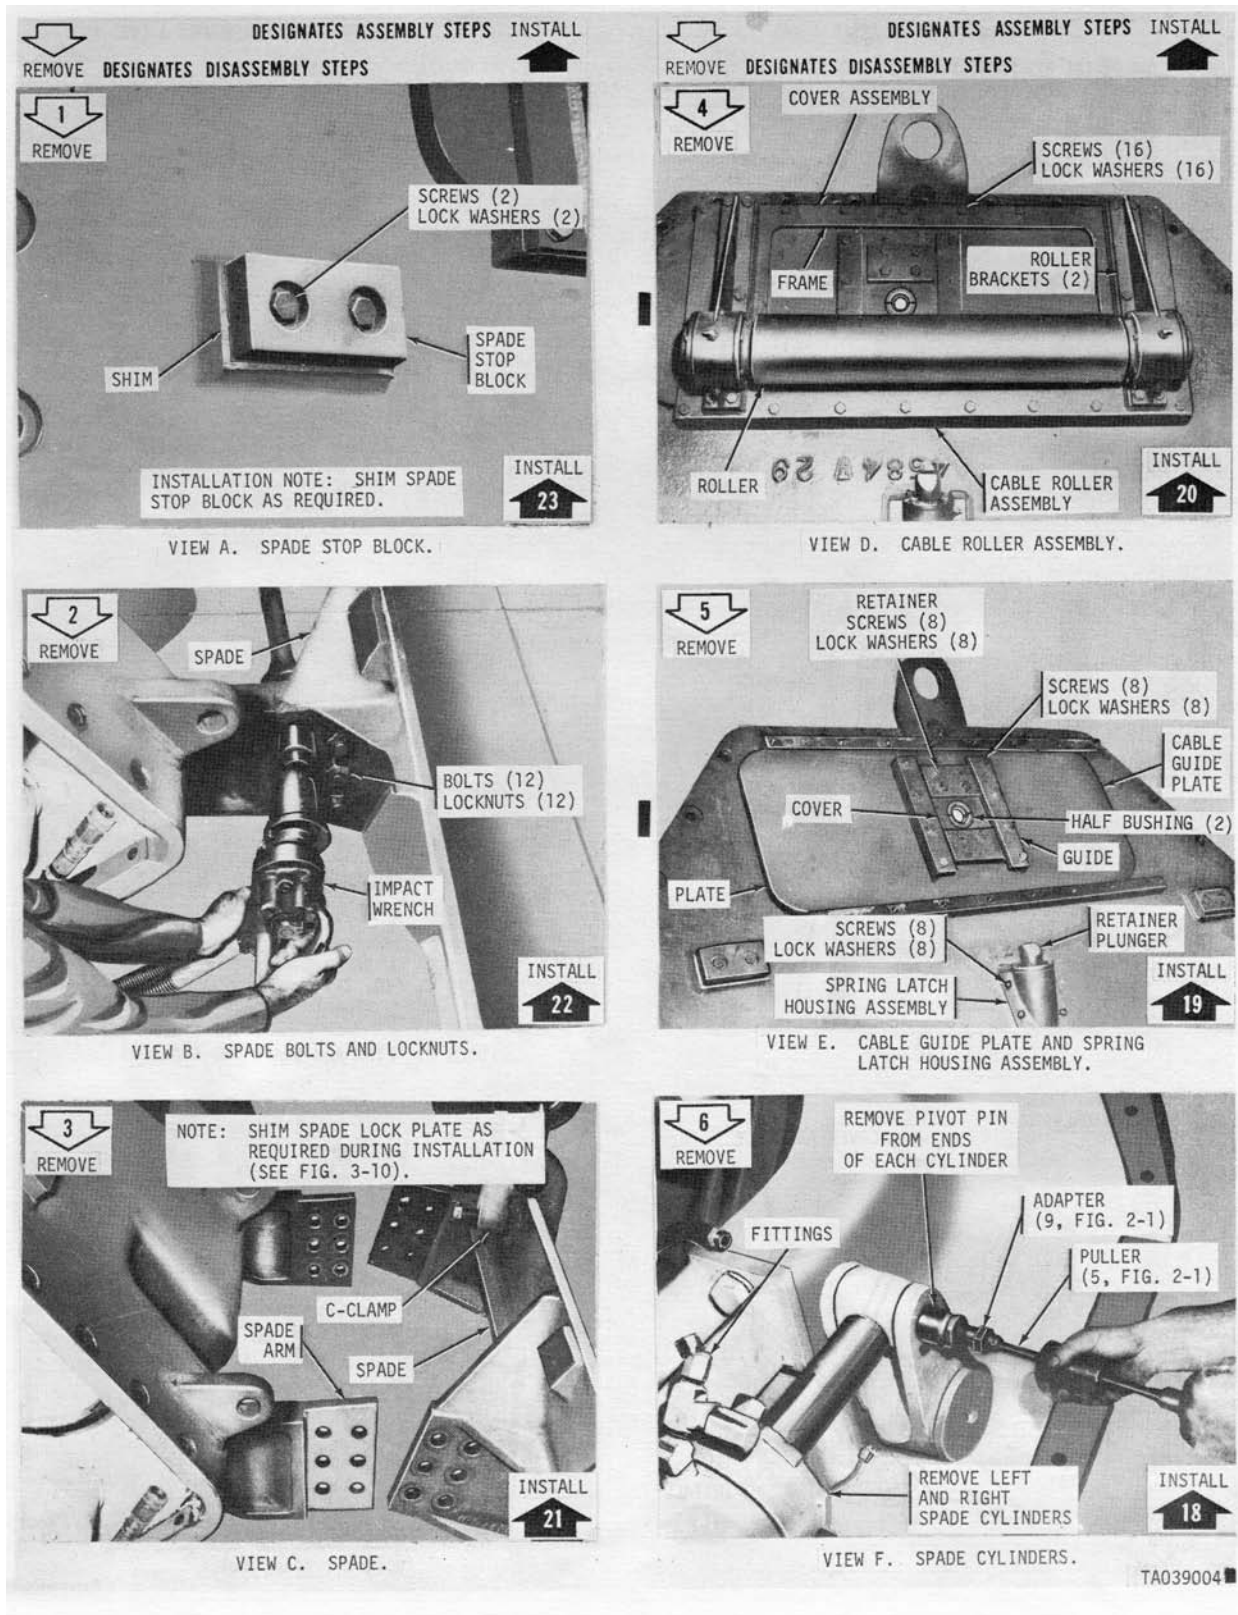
Disassembly of main winch and spade assemblies into subassemblies (Sheet 1 of 4).
